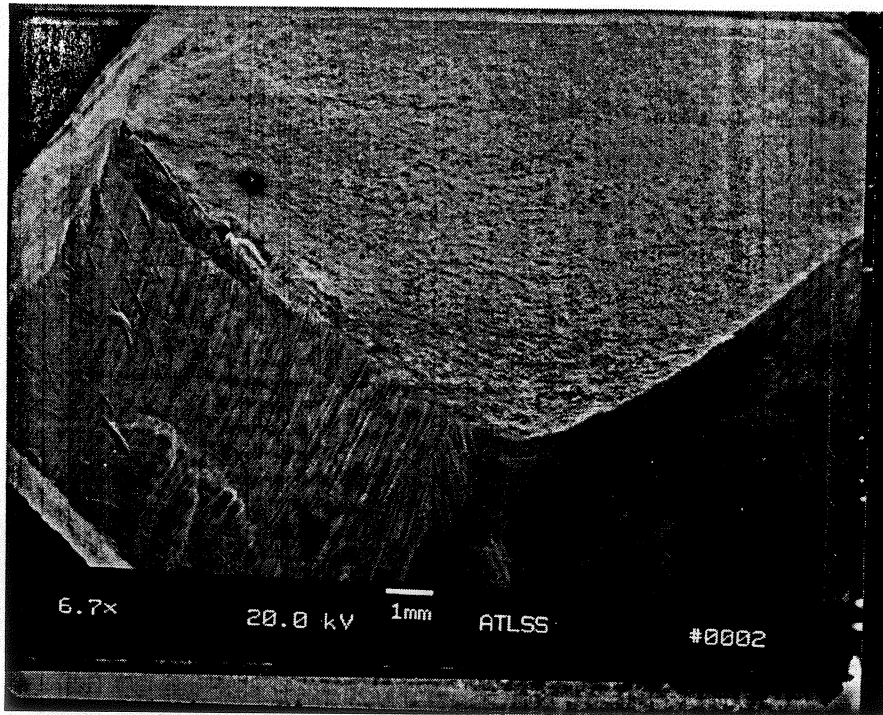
SEM View of the Crack Surface Showing Groove Along Plate Edge and Corner Crack Development @ 6.7X
